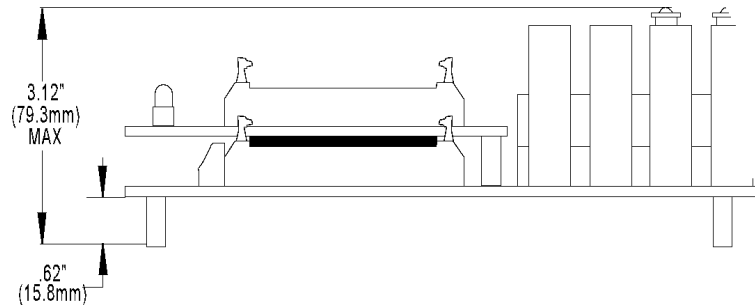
Vertical Dimensions of the B6 Mounted on a Rack
